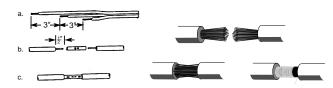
A: Cable Splicing: Solid Wire, Stranded Wire
